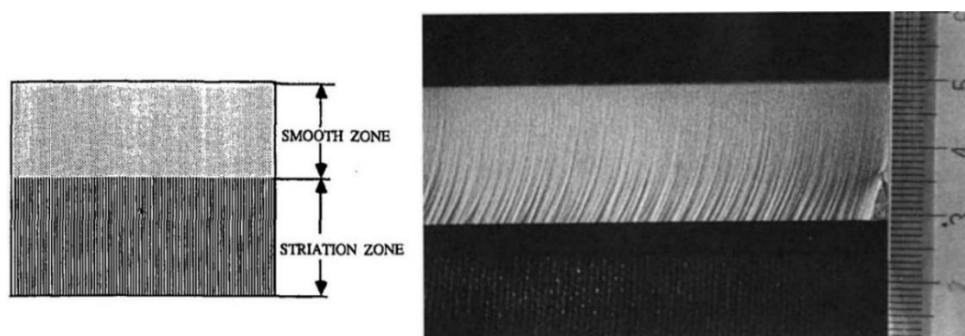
35 Two cutting zones of AWJ machined surface (Chao, et al., 1995)
